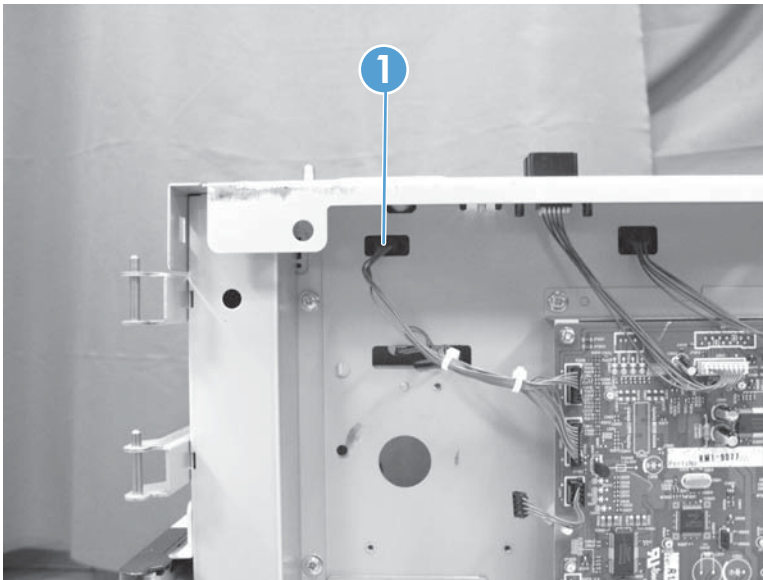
Remove the HCI right tray pickup assembly (2 of 2)
